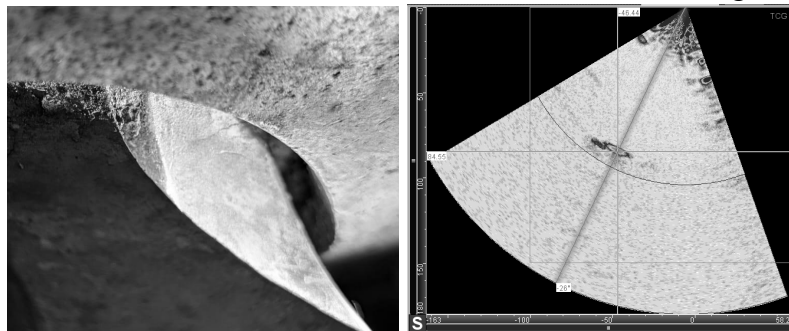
Real crack picture and S-scan from a real crack obtained with SHM prototype sensor
